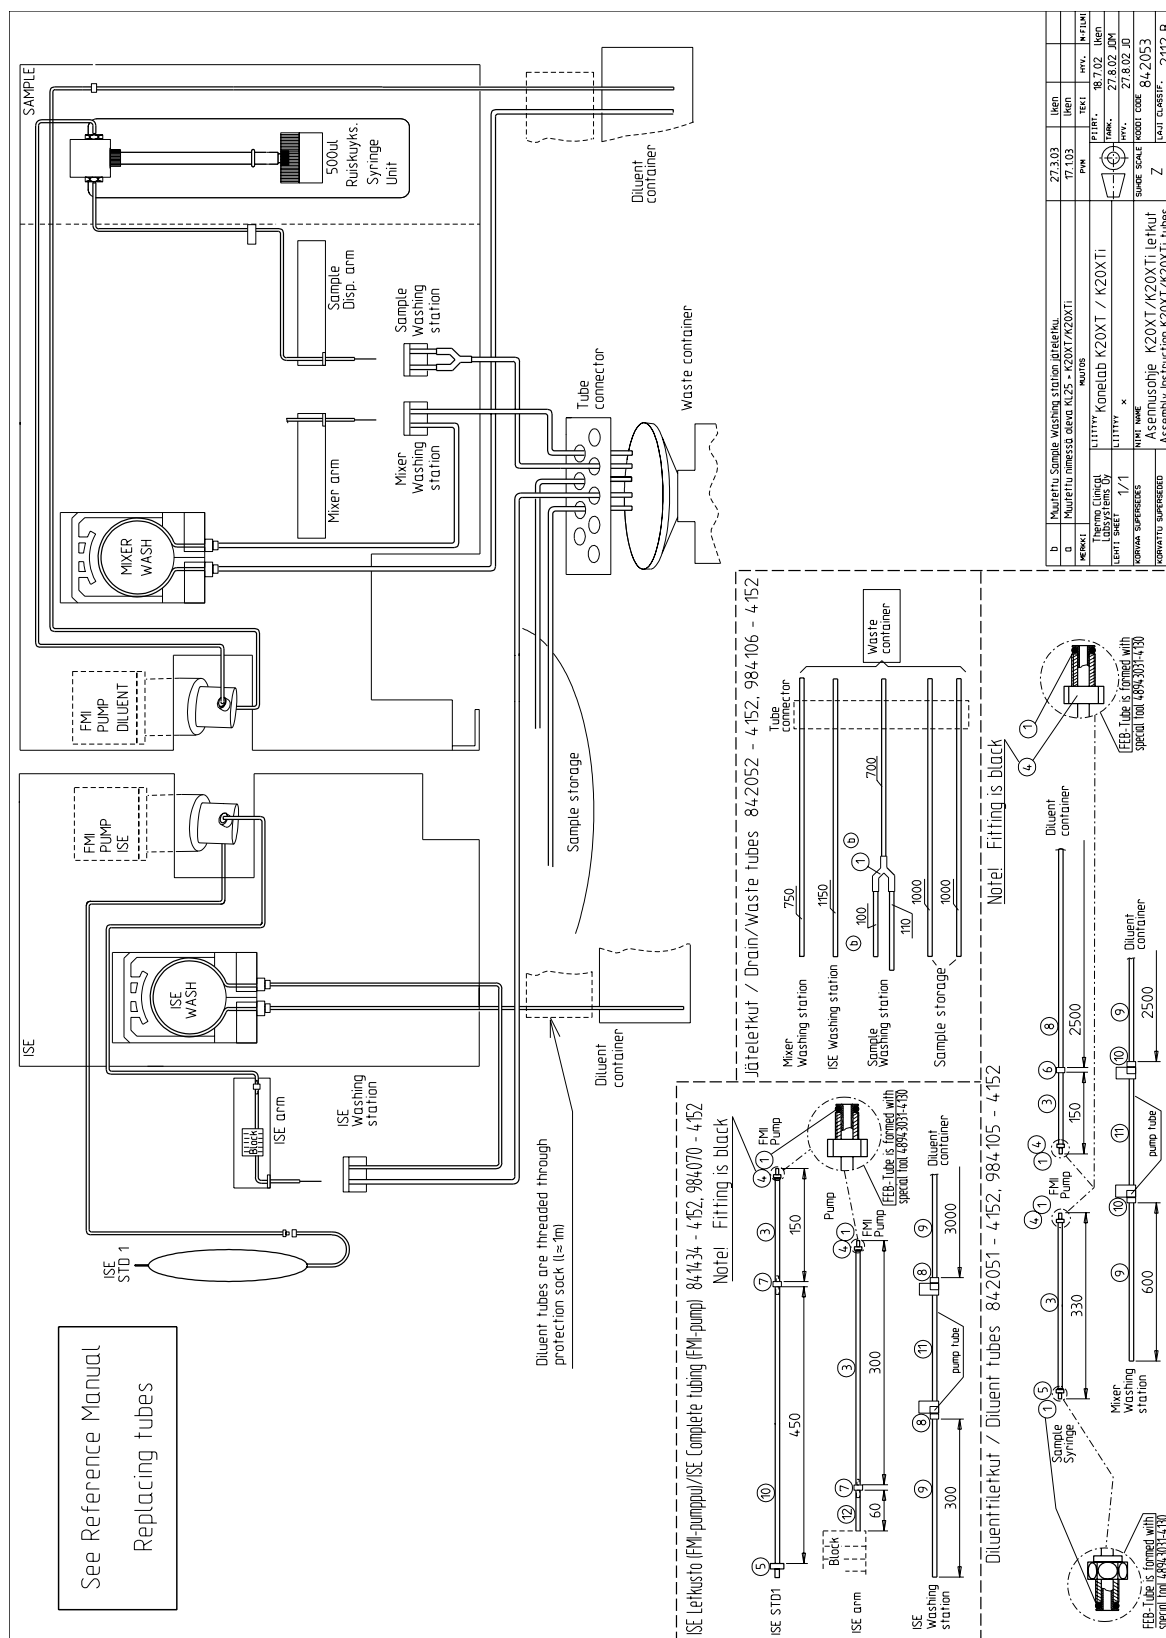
Konelab 20 XT: Assembly instruction p842053
